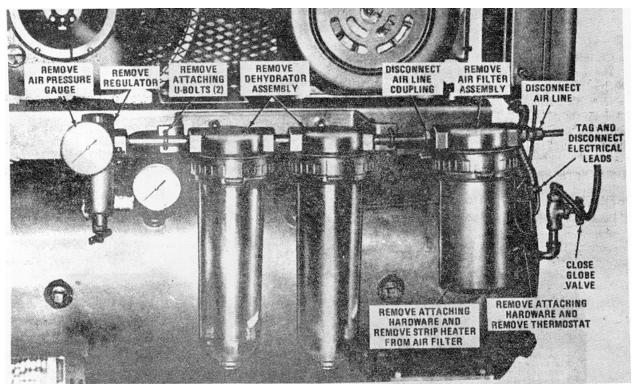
Air filter, strip heater, thermostat hydrator and regulator, removal and installation
